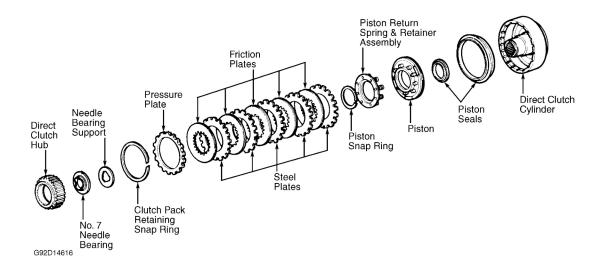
Exploded View Of Direct Clutch Assembly Courtesy of FORD MOTOR CO.
